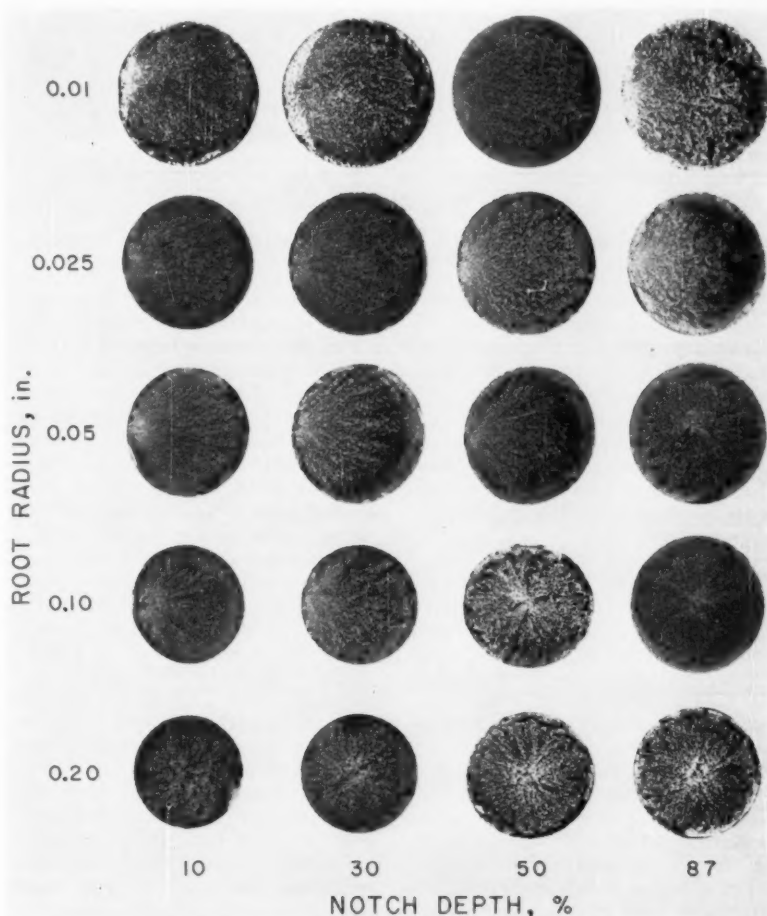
Fracture surfaces of notched specimens of titanium that were extended to fracture at 25 C (X 2.5). The chevron markings point back to the position of the initiation of the main fracture crack.
